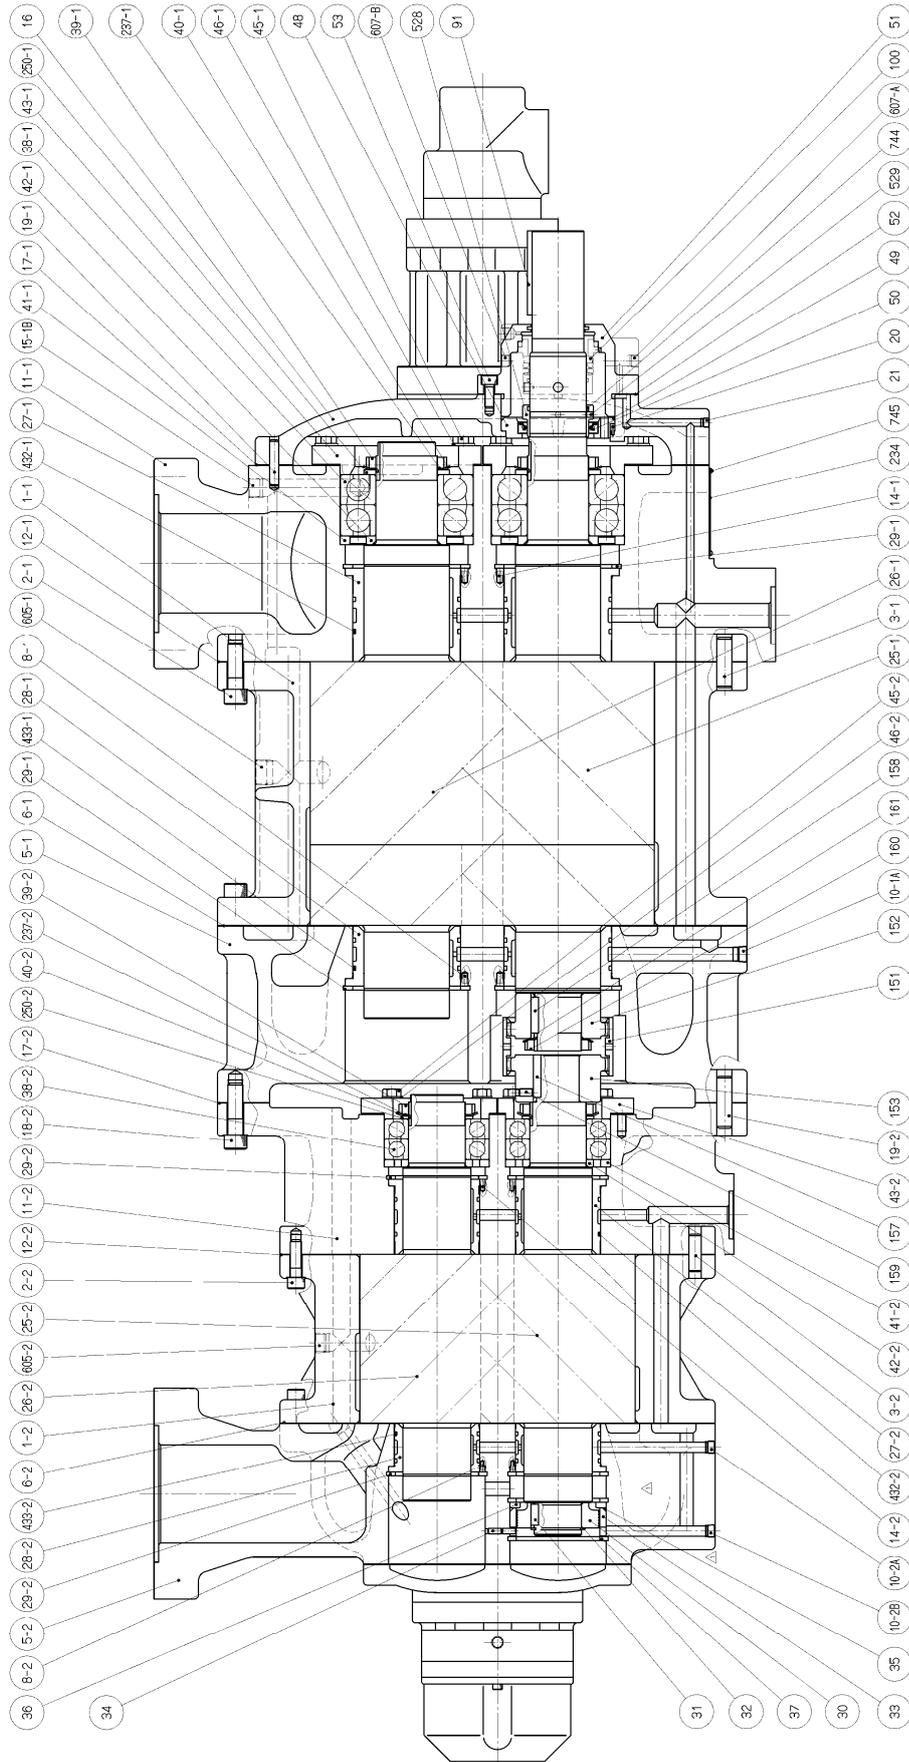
2016MSC Assembly Sectional View (Horizontal)
